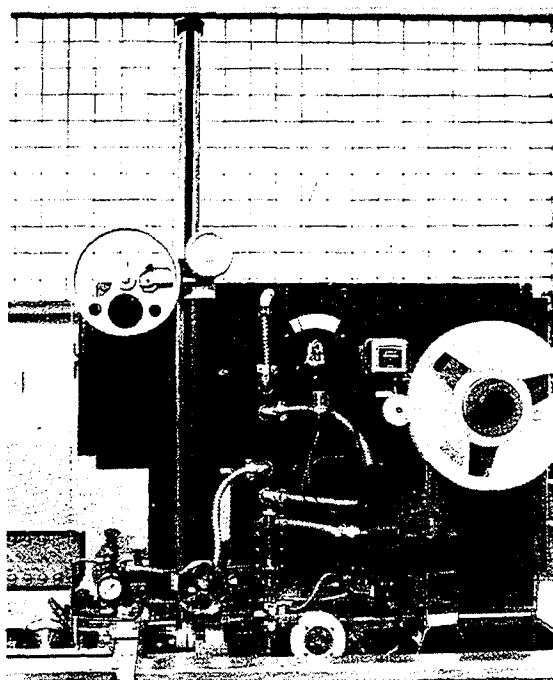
The weld unit in the foreground is located between the take-up column and the heat gun. Welder controls are housed in the cabinet in the background.
